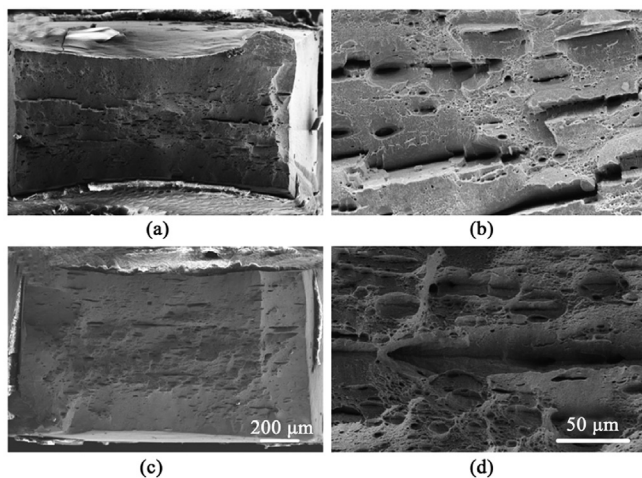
Fracture surfaces of the macro-tensile specimens tested in the (a, b) RD and (c, d) TD.
